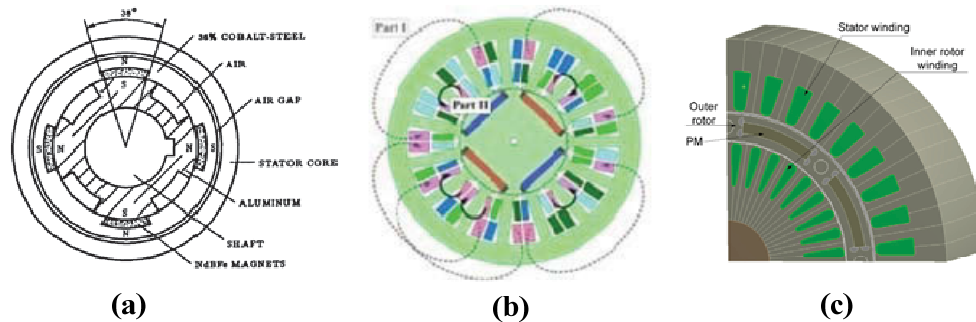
Cross sectional view of (a) PM hysteresis hybrid machine [2.1], (b) 4-layer hybrid winding machine [2.2], and (c) double rotor synchronous PM machine [2.3]
